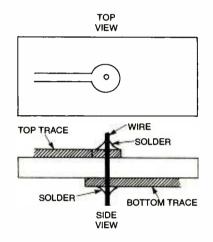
A poor-man's via is simply a small hole with pads on both sides of the board, in which a small piece of wire is inserted and soldered to both sides of the board.
